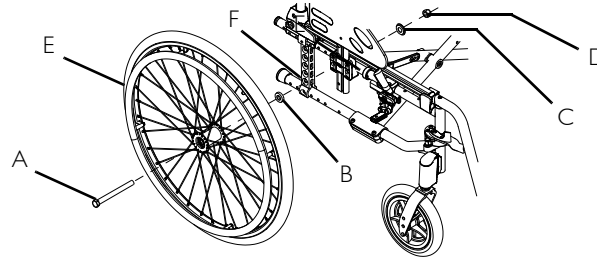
Removing/Installing Rear Wheels - Permanent Axles
